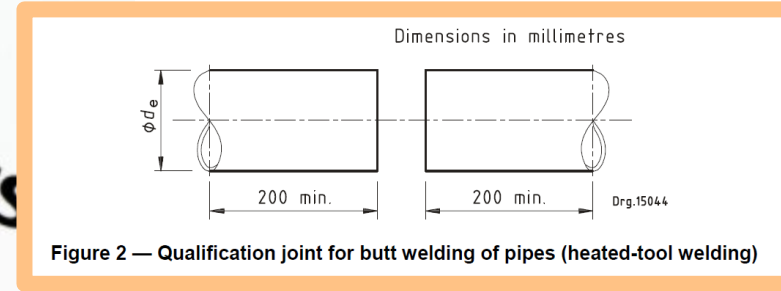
Qualification joint for butt welding of pipes (heated-tool welding)
